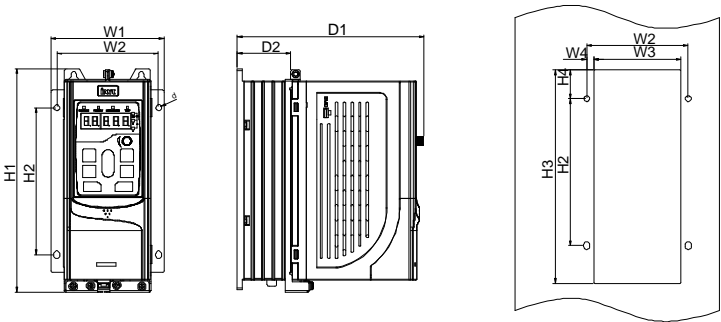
Flange mounting for VFDs in T1–T2 frames
